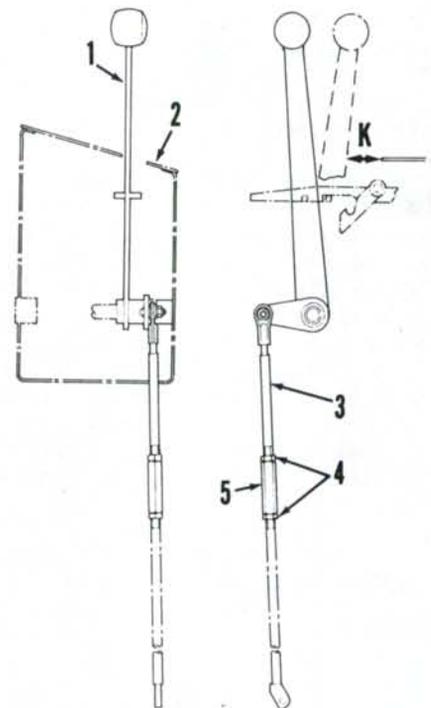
With quadrant control lever moved rearward to full lift position, distance (K) between lever and end of quadrant slot should be 36 mm (1-7/16 inches).
